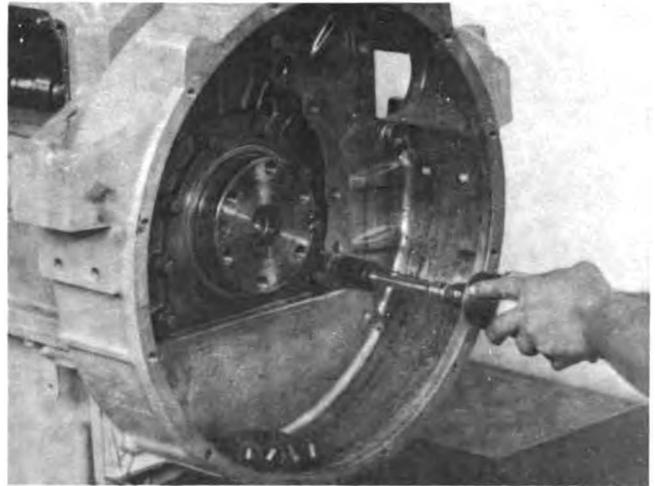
Remove The Capscrews That Hold The Flywheel Housing.
